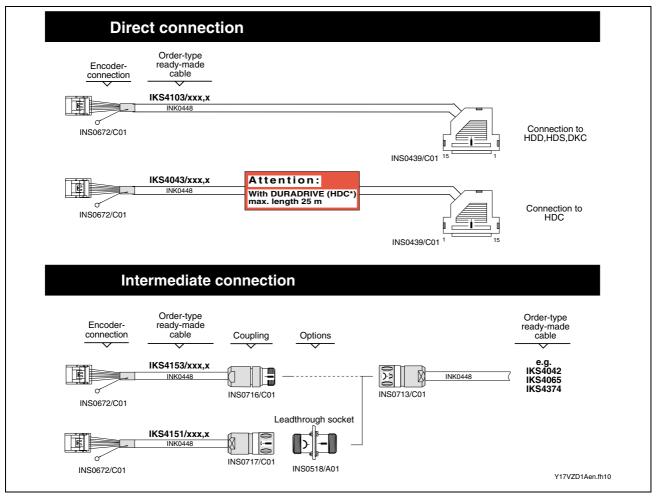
Encoder cable for MKD025, -041, -071, -090 with connection box
